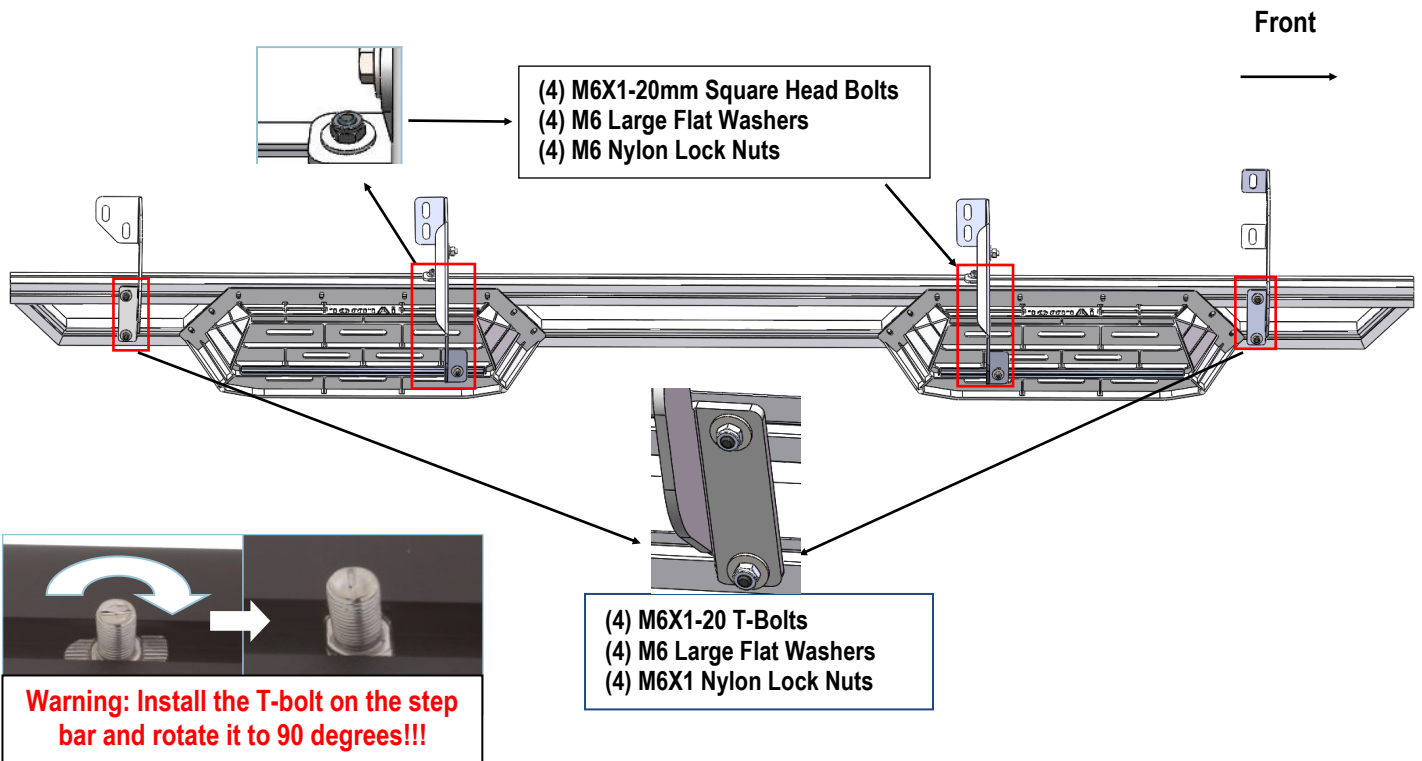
Driver Rear Mounting Bracket (DRM) Installation
